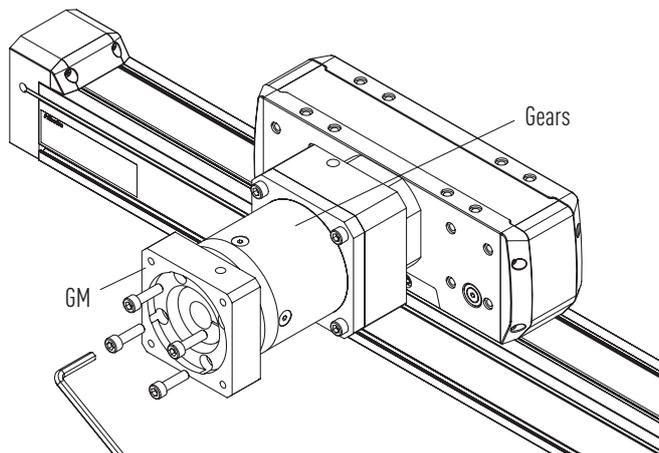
Mounting the motor gear adapter plate GM (HC-B)
